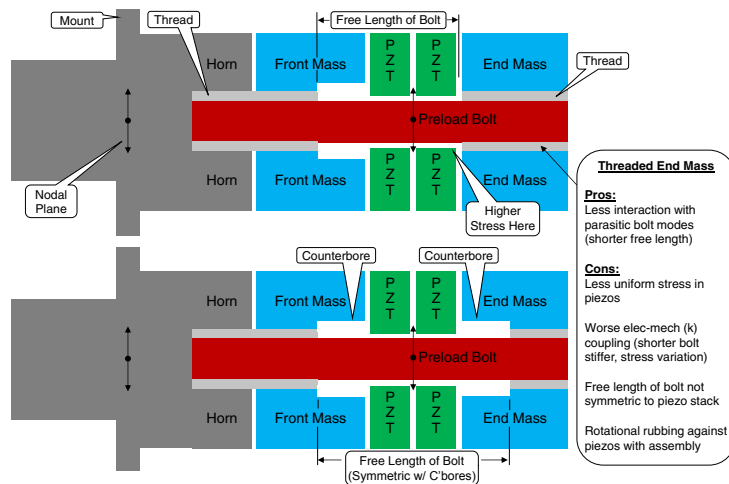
Pros and cons of a threaded end mass configuration for preload screw.
